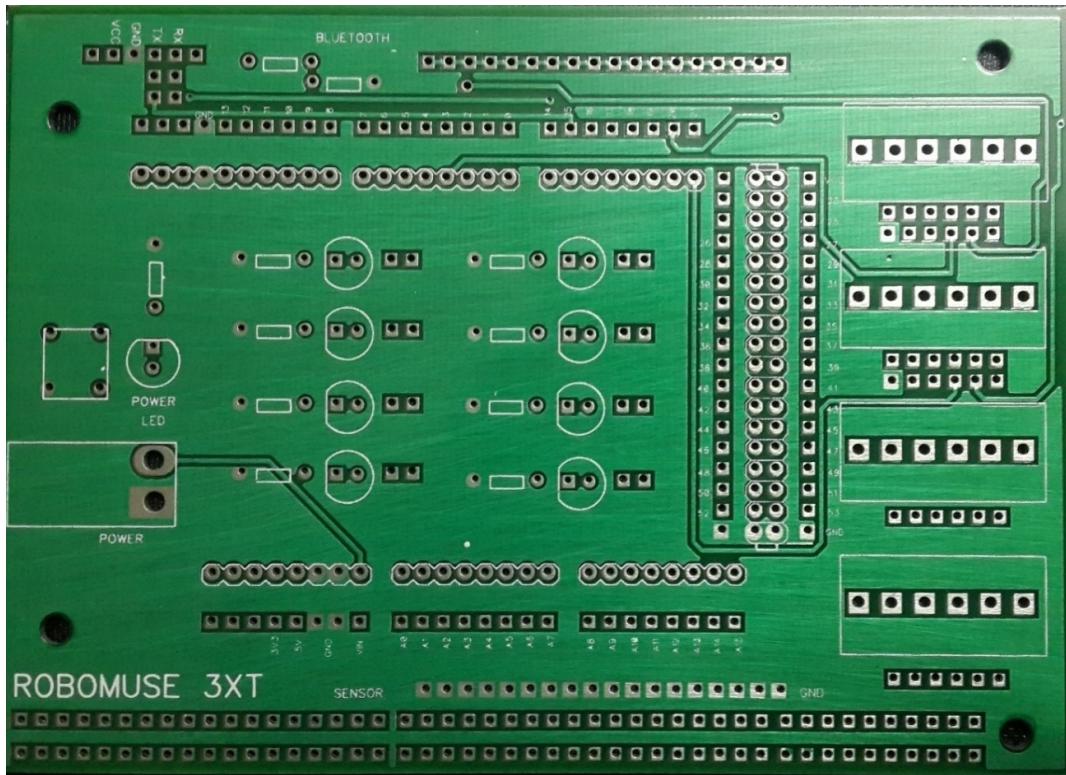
Arduino Mega PCB after fabrication - Top Layer
